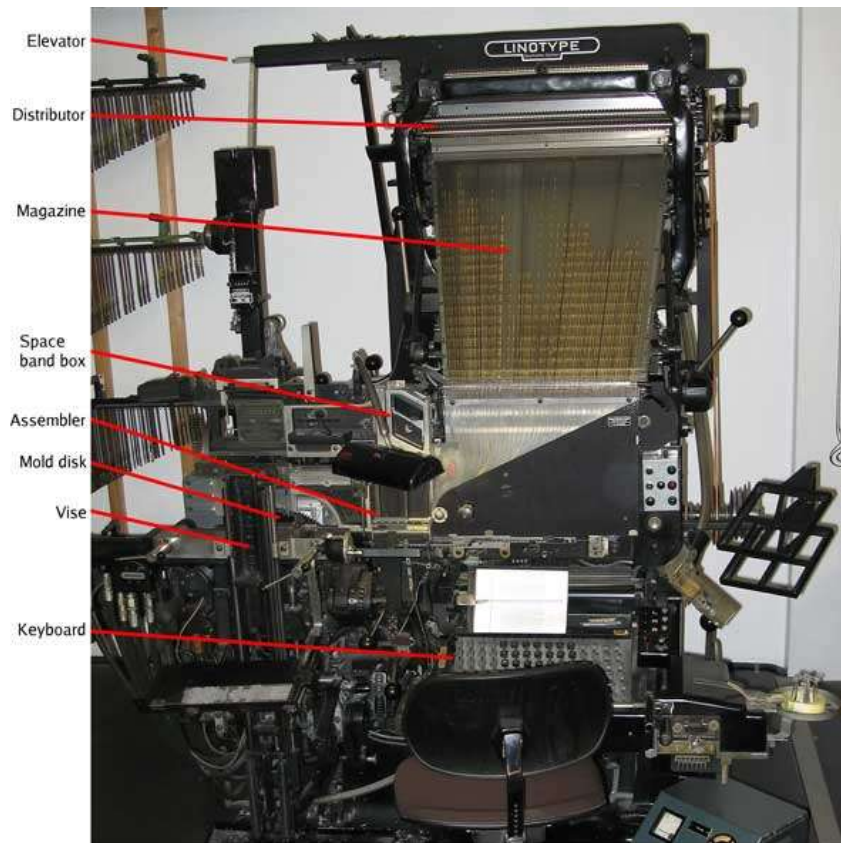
Linotype machines used to cast molten metal into lines of type for printing. [Wikipedia](#) explains in some detail how this technology worked. How mechanical typesetting works (Intertype, Linotype, Hot Metal).
